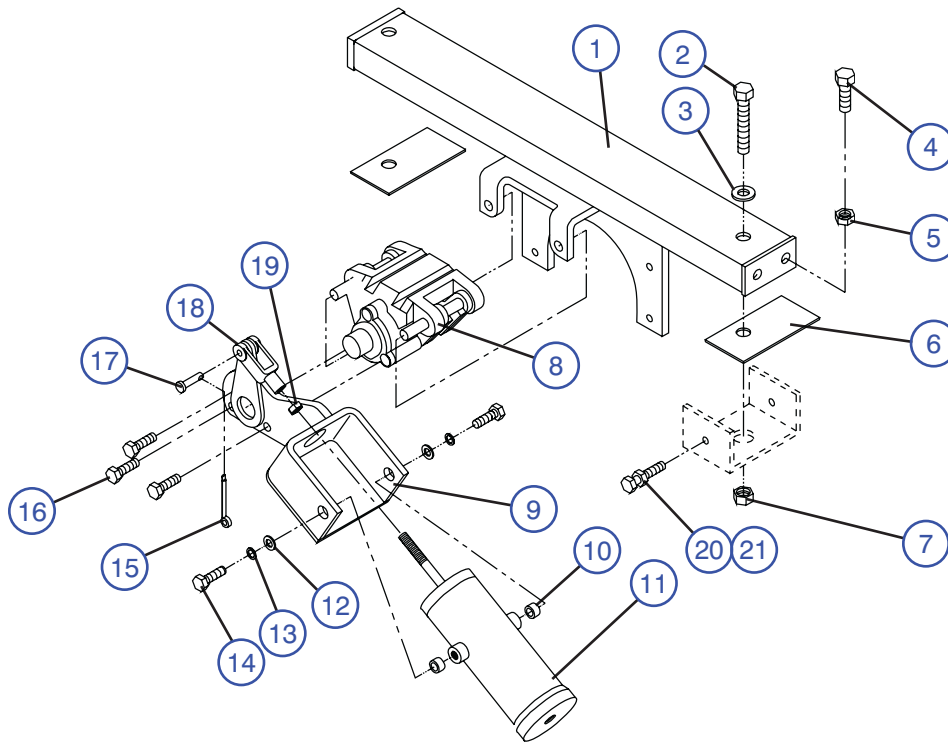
Rear Axle Assembly (Dana Axles) (Continued)
